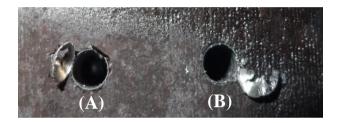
Burrs formed in D2 (A) Uniform Burr with cap (B) Uniform Burr with chips
